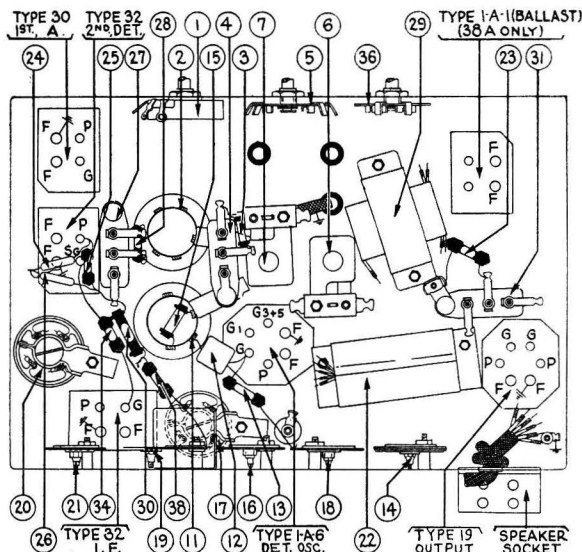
Bottom of Chassis Showing Parts; and Sockets for Testing Voltages
